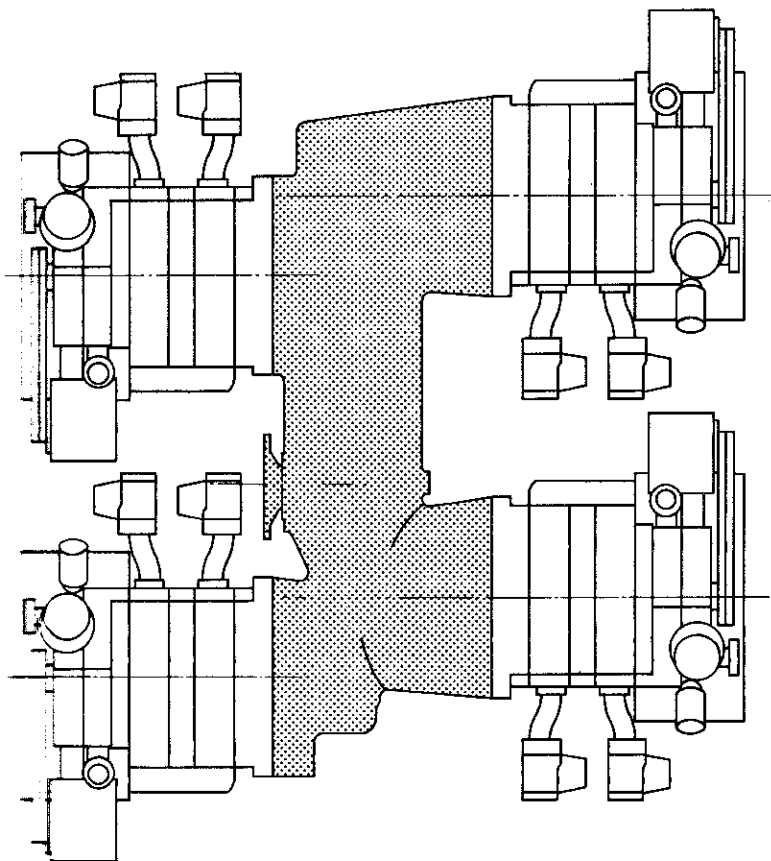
and 7.3 and print No.2 show a more orthodox approach to transmission design than 7.1, relying exclusively upon gearing for coupling two or four engines together. The gearbox elevation is the same in both cases.
